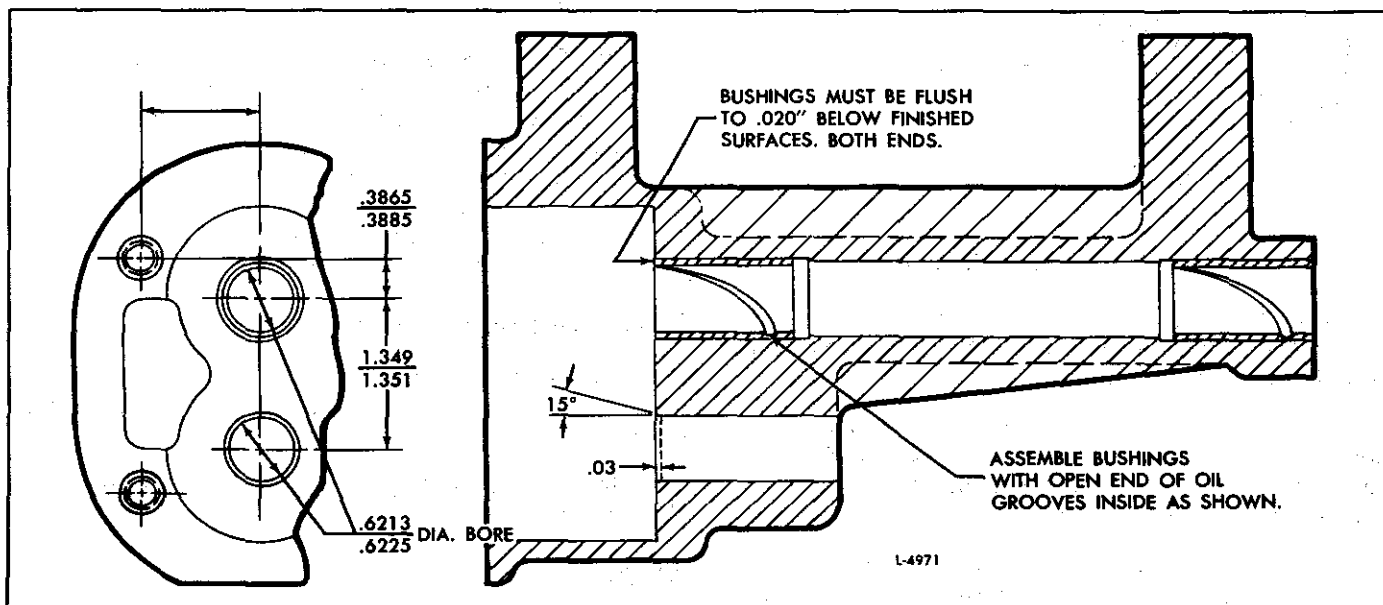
Diameter and Location of Bushings in Oil Pump Body
